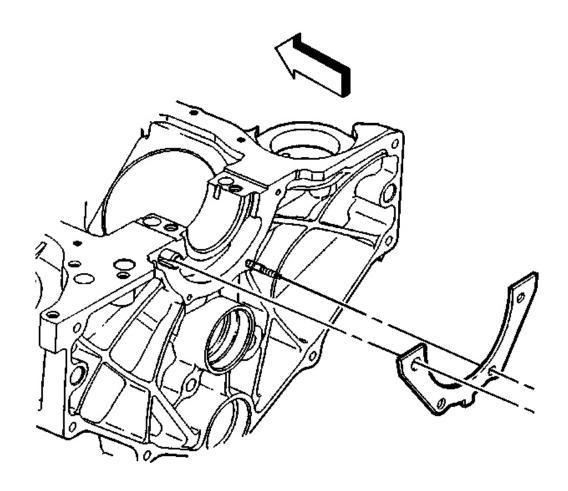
Identifying Crankshaft Rear Oil Seal Housing Gasket Courtesy of GENERAL MOTORS CORP.
